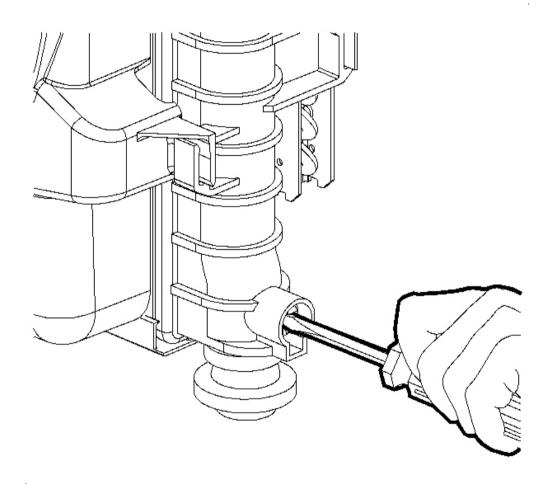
View Of Thermostat (L61) Courtesy of GENERAL MOTORS CORP.
